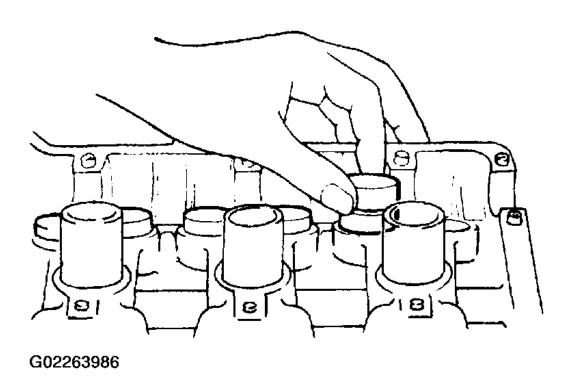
Filling Oil Passage Of Cylinder Head With Engine Oil Courtesy of SUZUKI OF AMERICA CORP.
